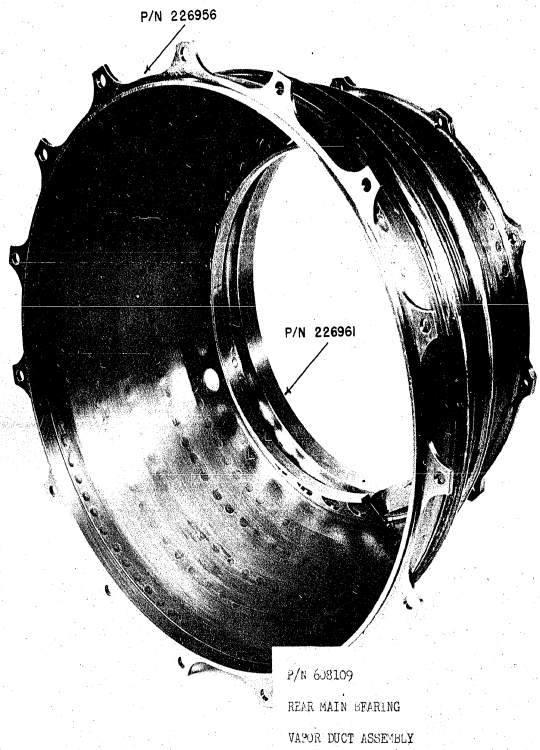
P/N 608109- REAR MAIN BEARING VAPOR DUCT ASSEMBLY
